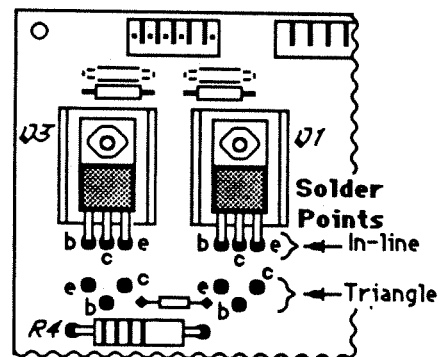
Solder Points for Power Supply Transistors Q1 & Q3.
